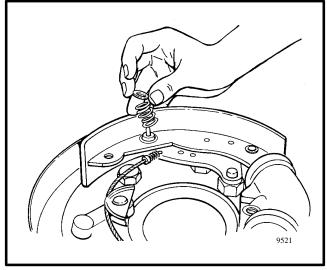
INSTALL THE RETAINER SPRING ASSEMBLY
